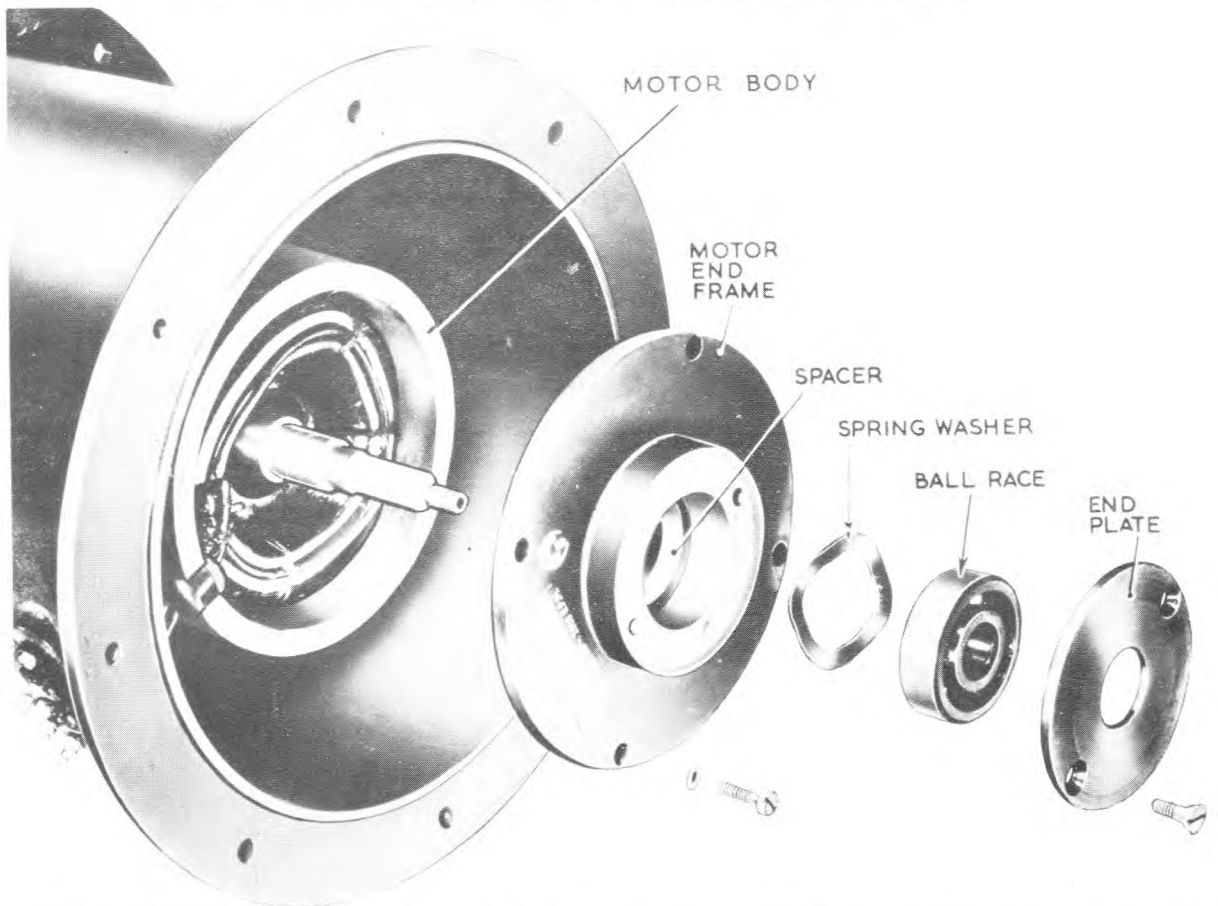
Second stage impeller end of fan with end plate and bearing removed
